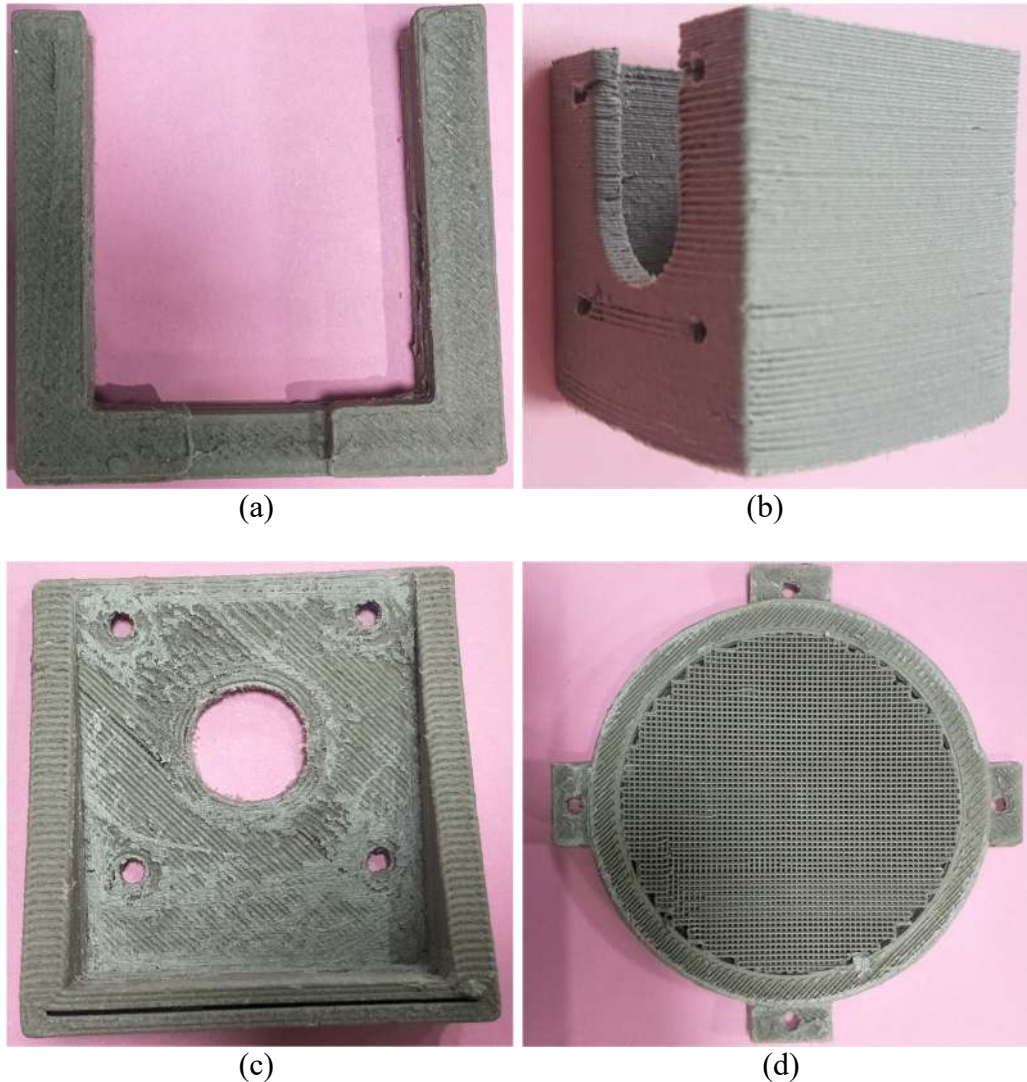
Prototype components printed in the study: (a) Support channel (b) Motor mount with fillet (c) Motor mount (d) Filter end cap.
